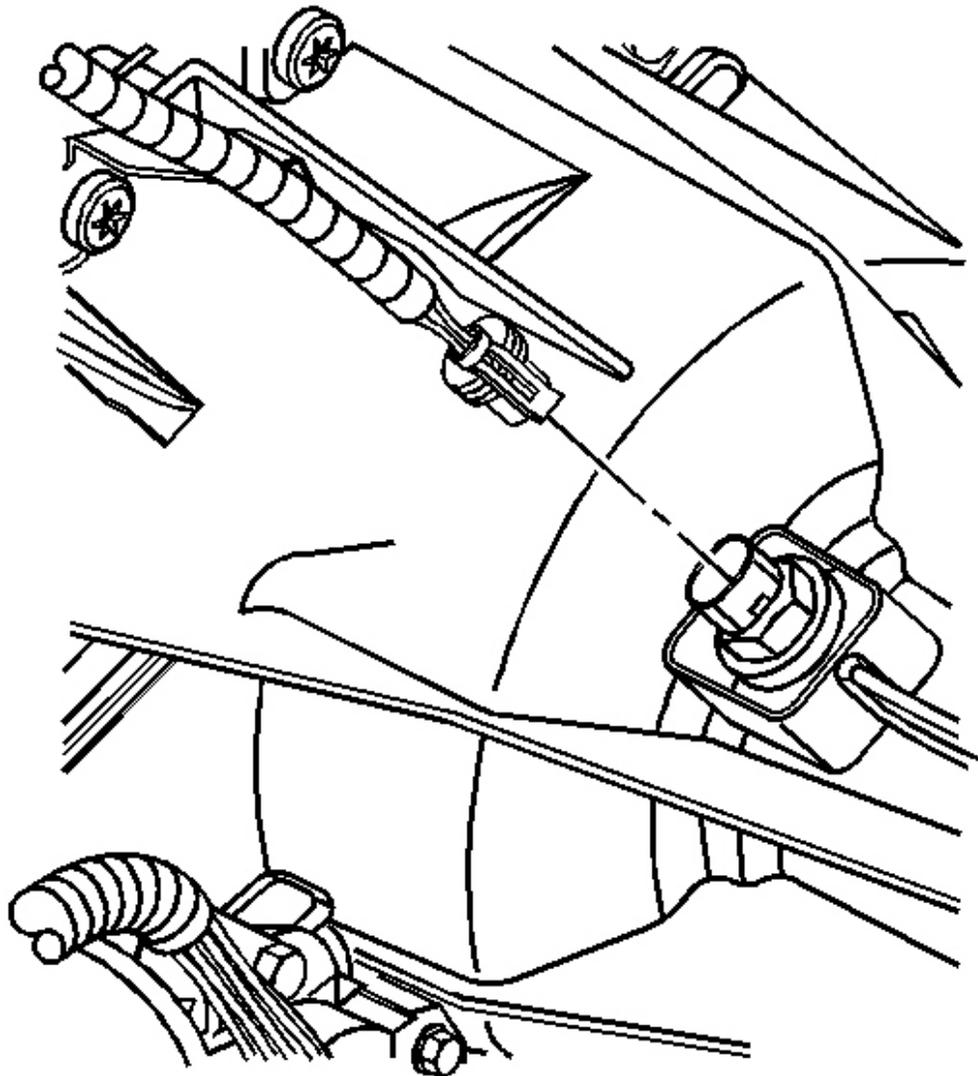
Electrical Connector & Vehicle Speed Sensor
